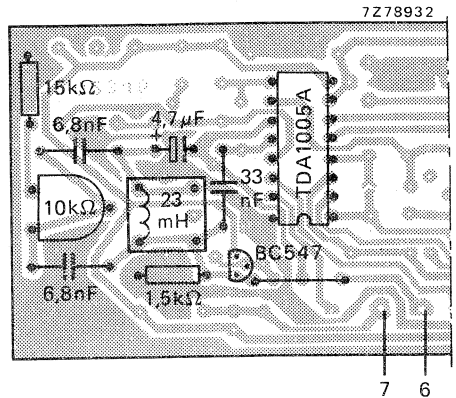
Printed-circuit board component side, showing component layout of Fig. 19.
